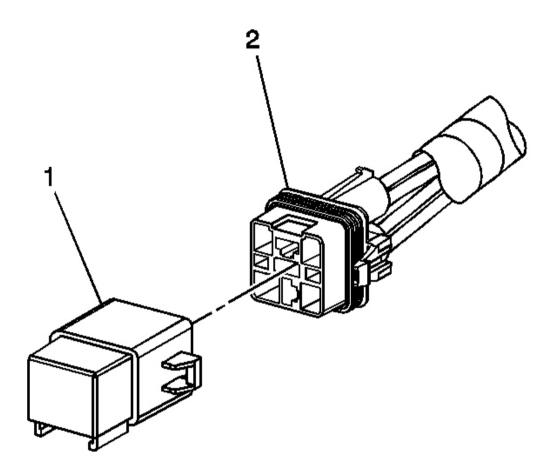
Identifying Relay & Wire Harness Connector Courtesy of GENERAL MOTORS CORP.
